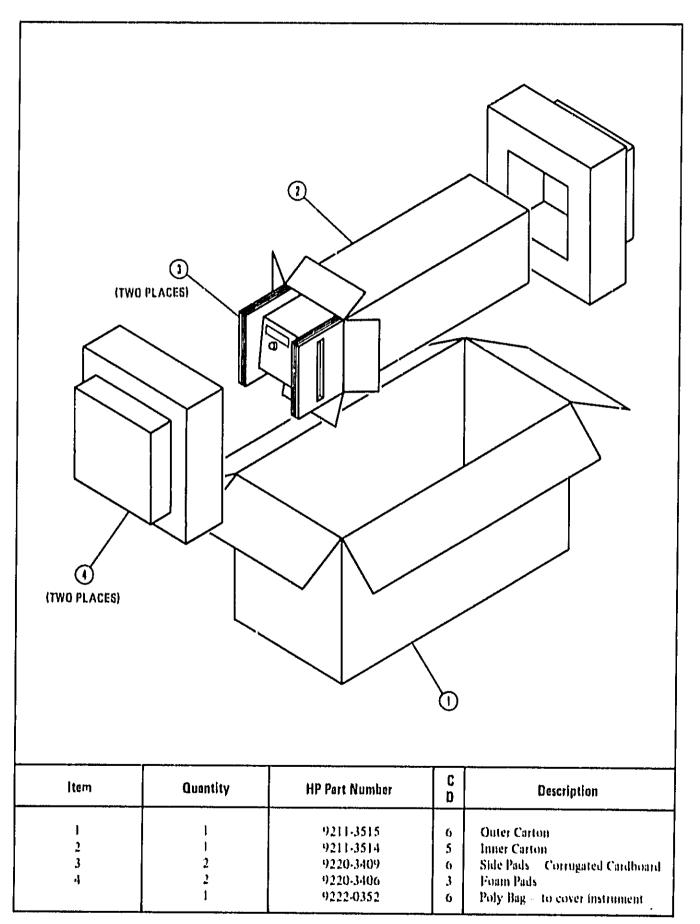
Packaging for Shipment Using Factory Packaging Materials
